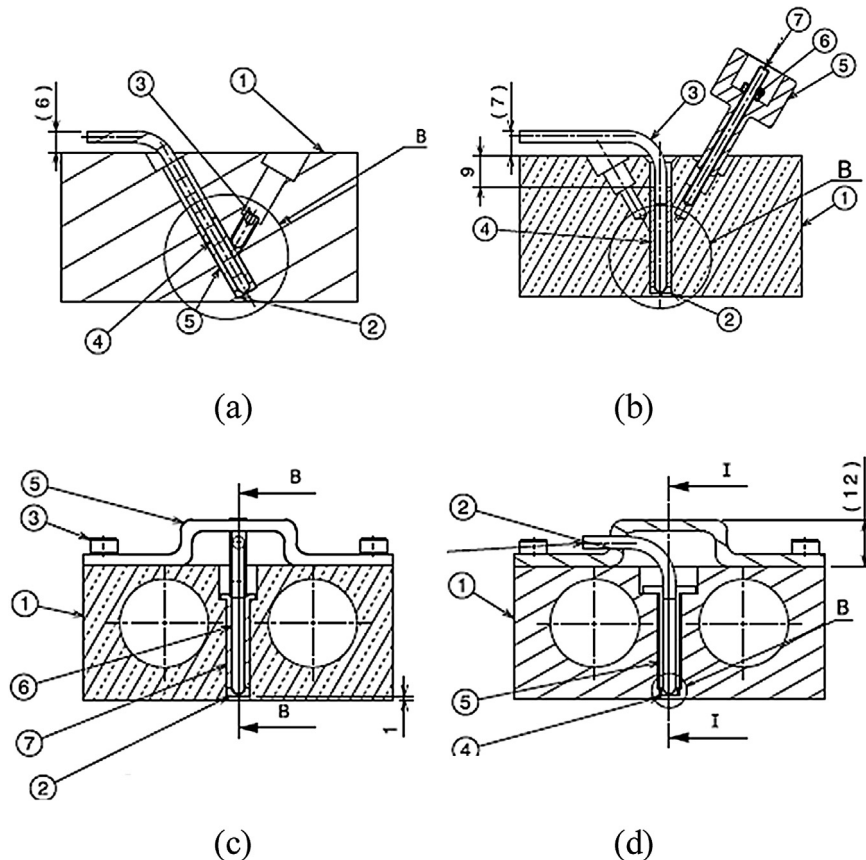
Developed thermocouple fixation scheme. (a) Hammering on one side, (b) Hammering on both side, (c) Fixation with set screw, (d) Threaded thermocouple.
